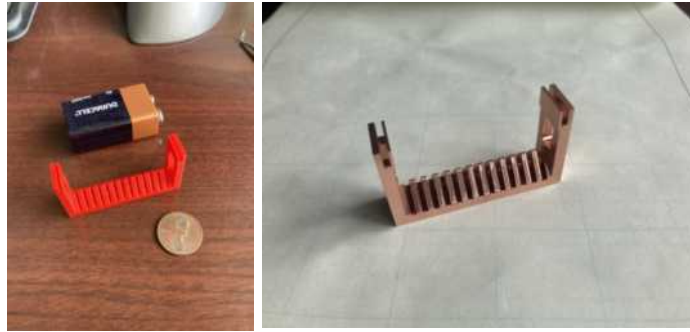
DAMIC tip spacer - Prototype and Final
